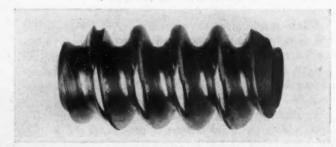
This special form, rolled in SAE 1020 steel, indicates the extremely high quality surface finish obtainable
